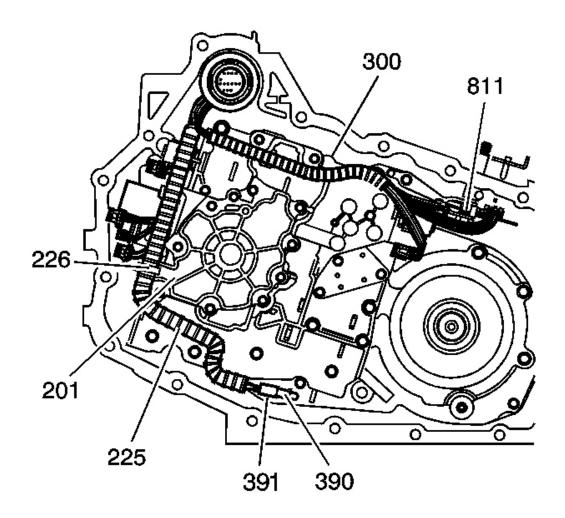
Aligning Wire Harness Onto Control Valve Body Courtesy of GENERAL MOTORS CORP.
